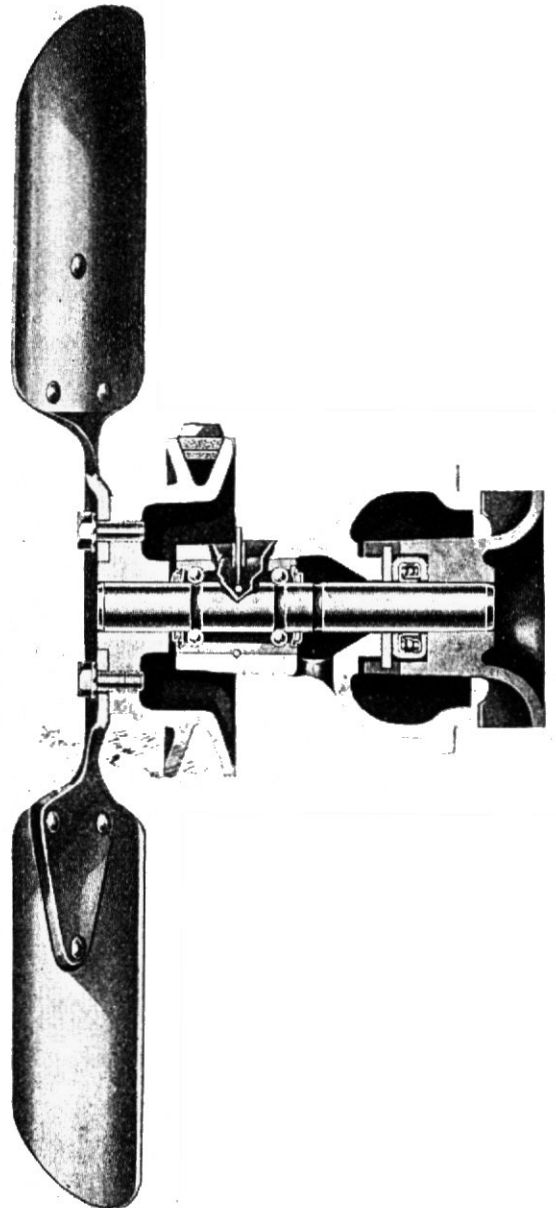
WATER PUMP AND FAN ASSEMBLY
